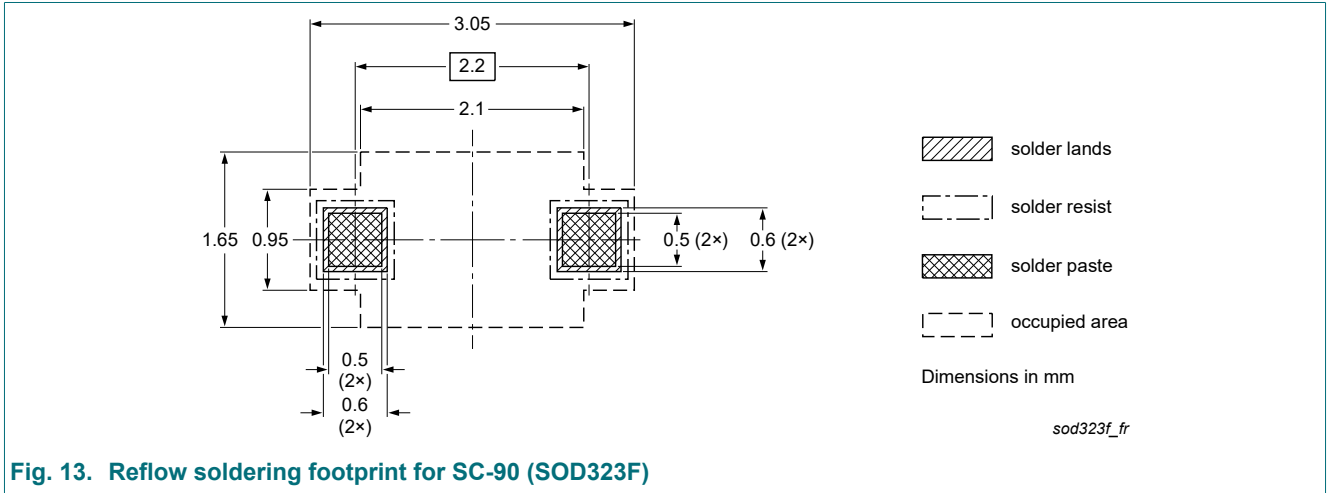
Reflow soldering footprint for SC-90 (SOD323F)
